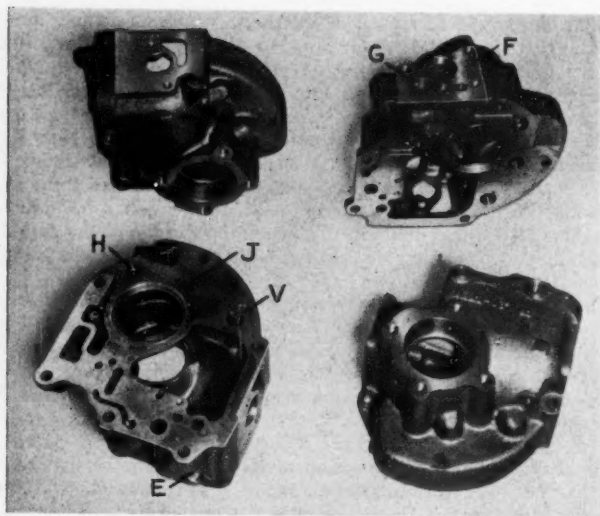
Views of Four Completely Machined Rear Extension Castings, Showing the General Shape and the Surfaces and Bores which are Machined
